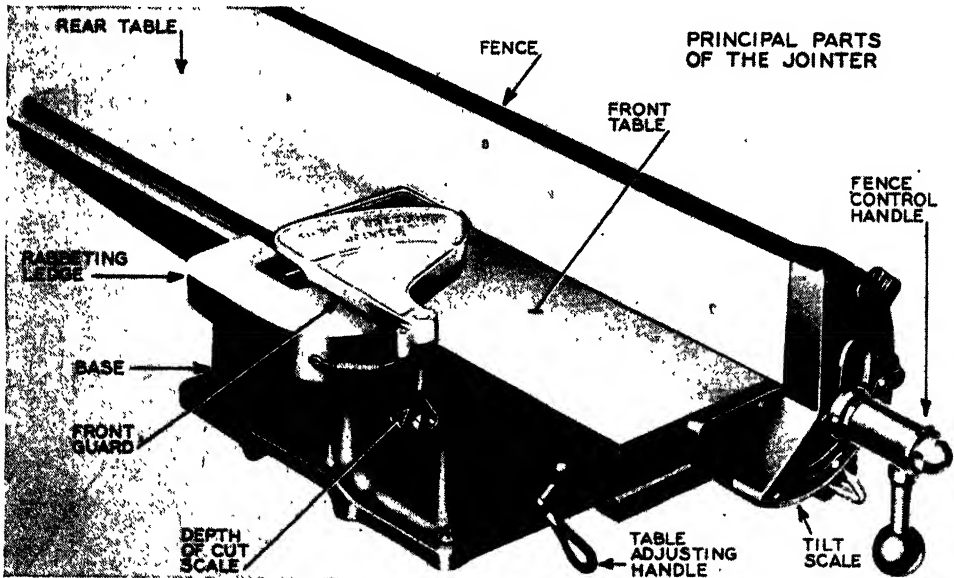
The jointer is used principally for smoothing and straightening surfaces and for cutting rabbets and bevels. (Delta Power Tool Division, Rockwell Manufacturing Company)
